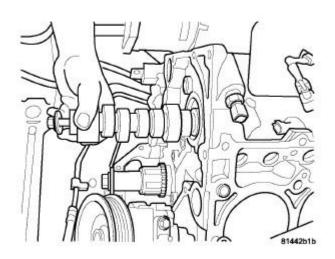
CAMSHAFT REMOVAL/INSTALLATION Courtesy of CHRYSLER LLC
